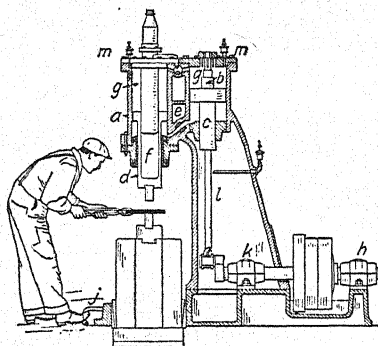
Power hammer. *a.* Housing. *b.* Piston. *c.* Connecting rod. *d.* Hammer. *e.* Port. *f.* Ram. *g.* Ram cylinder. *h.* Bearing. *j.* Treadle. *k.* Bearing. *l.* Frame. *m.* Ram cylinder head. (Courtesy of *Nazel Engineering and Machine Works.*)
